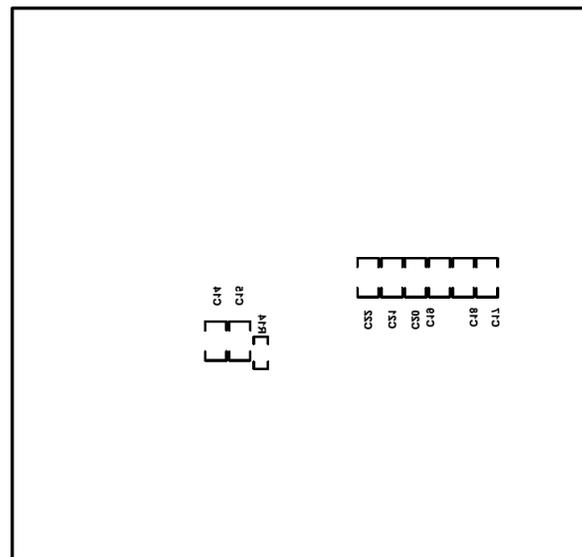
TPS53317AEVM-726 Bottom Assembly Drawing (Bottom View)
